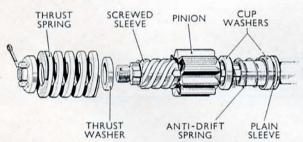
Details of the starter run-off helix drive used on diesel-engined models
